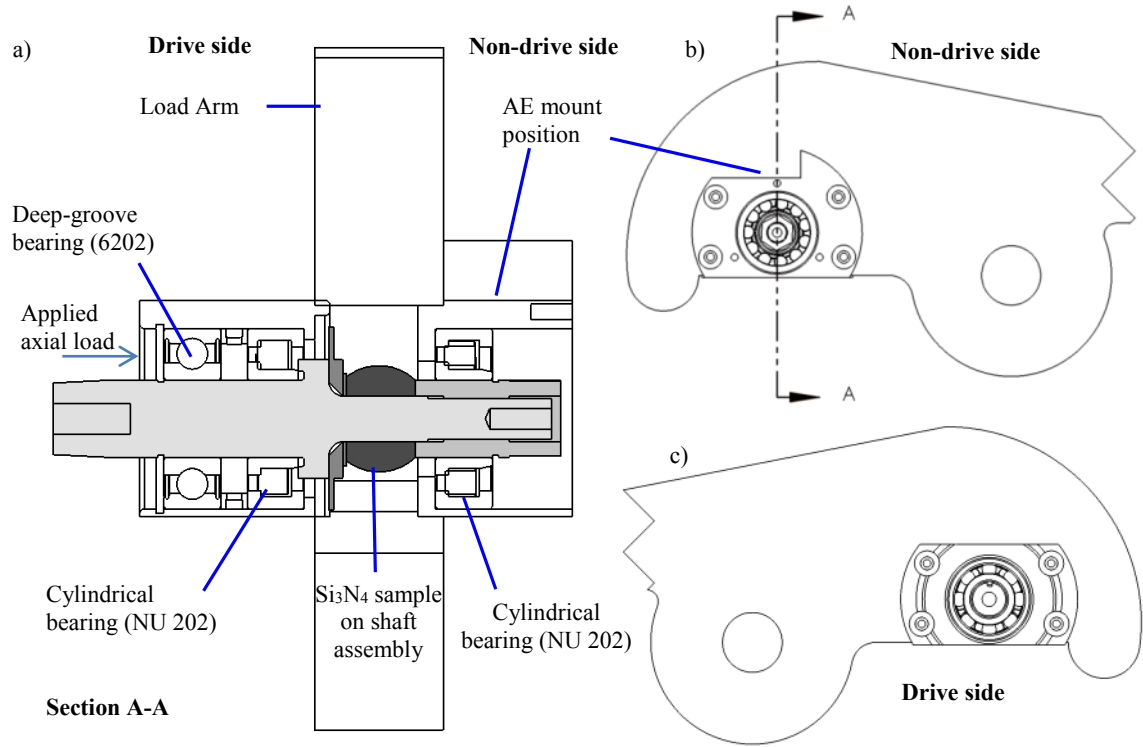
Assembly of the modified upper shaft and its modified upper bearing housings attached to the Load Arm. a) front-on-view sectioned vertically at the shaft axis shown in (b). b) & c) the side-on-views.
